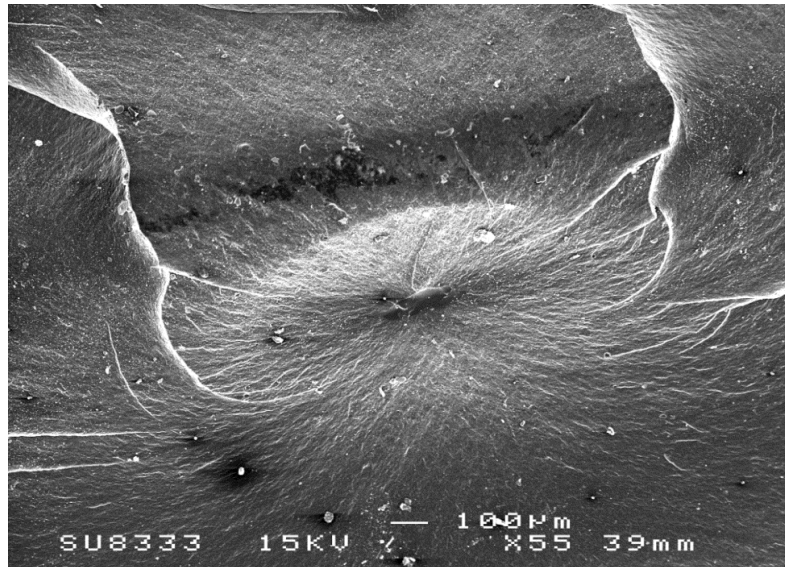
Fracture surface of a spring seal, small multiple cracks initiating from a flaw and combining to form bigger cracks.
